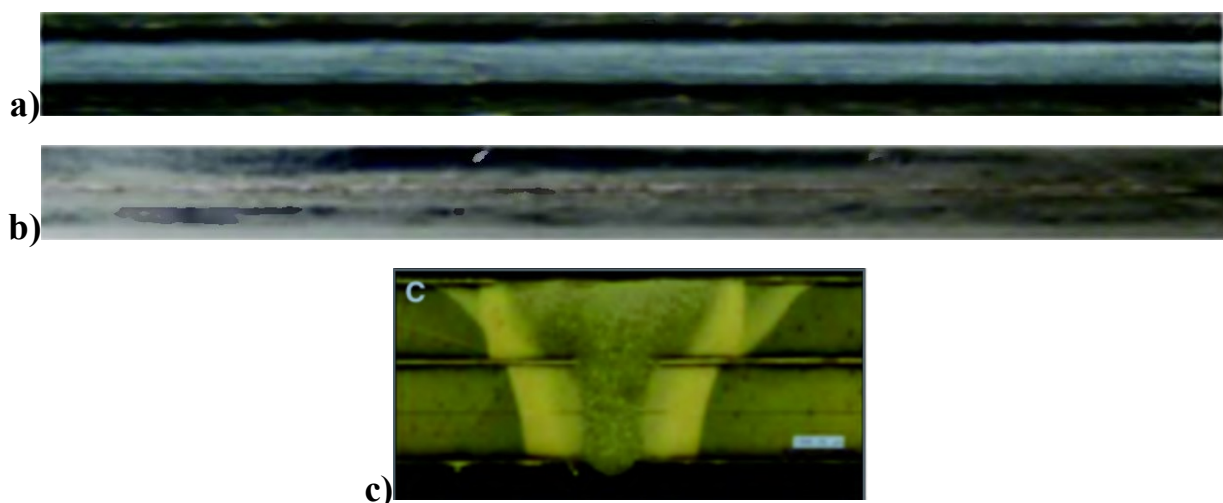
Joint types of hybrid laser-GTAW welding with preheating [9]: a) – from above; b) – from below; s) – seam cross-section (laser power 3000 W, arc current 200 A, welding speed 30 mm/s).
